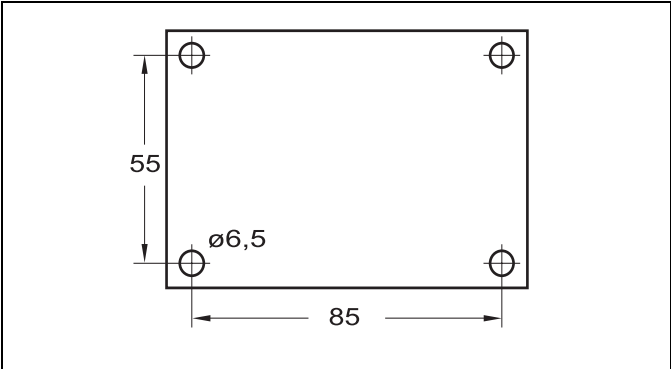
Hole pattern for the stand for the U 4854 circulating pump
